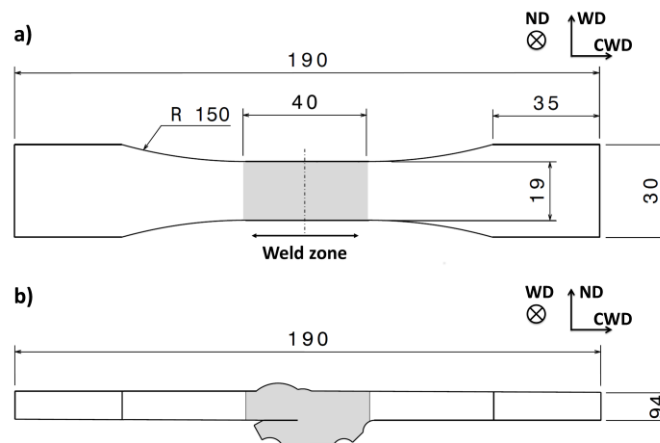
Geometry of the tensile and fatigue specimens according to ASTM-E466 standard (dimensions in millimeters). The weld was centered in the specimen gage for the two weld configurations: a) top view, b) side view, for the GMAW configuration.
